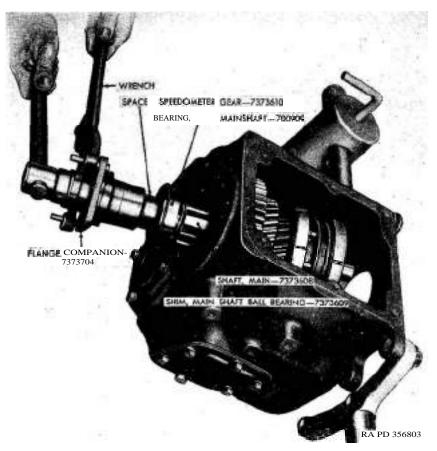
Installing main shaft ball bearing and holding companion flange with wrench.
